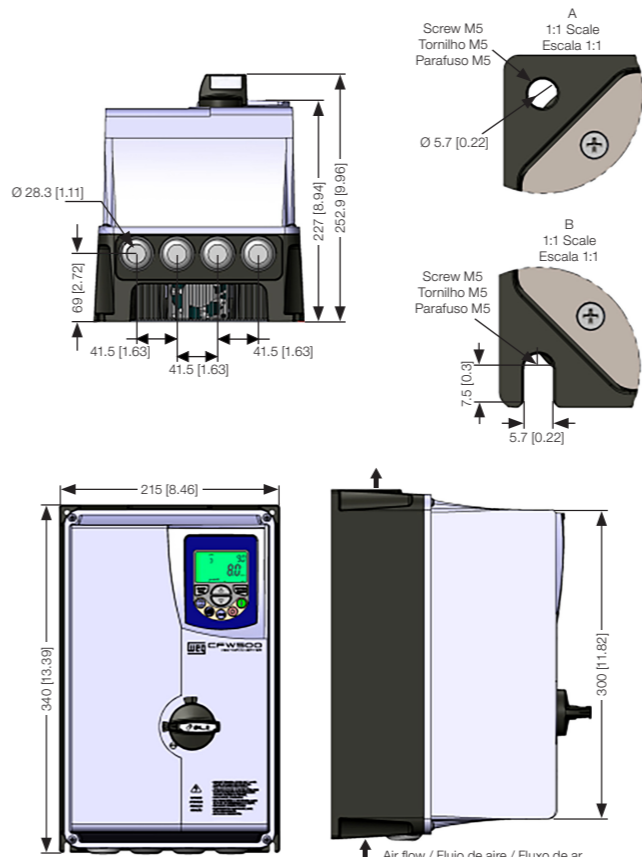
Dimensions of the CFW500 IP66 frame size B
